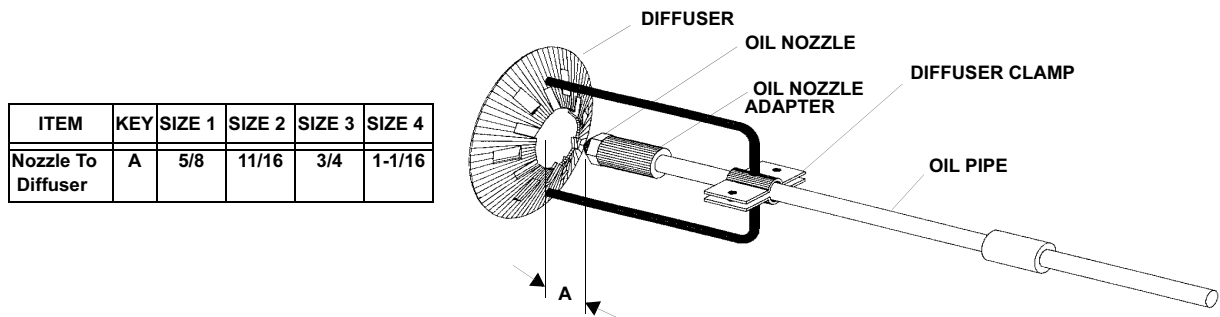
Nozzle / Diffuser / Air Baffle Alignment
